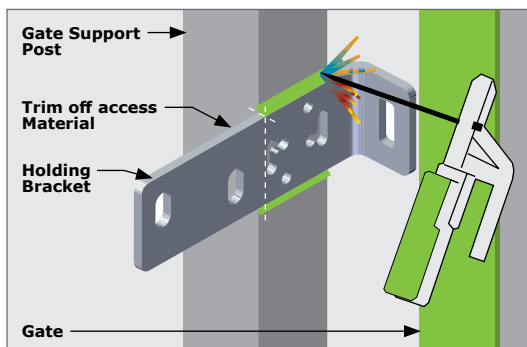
HOLDING BRACKET - SUPPORT POST
